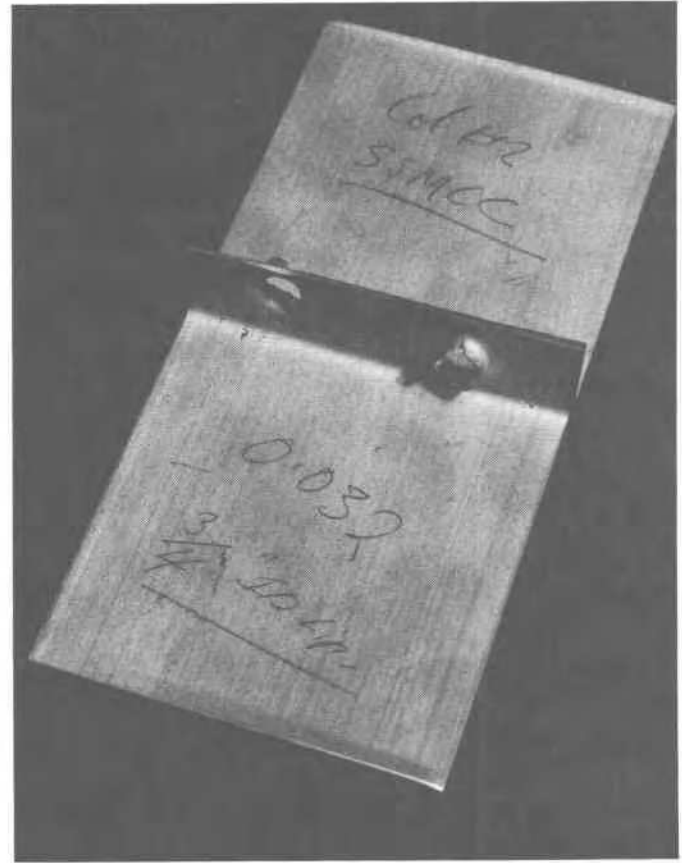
Close-Up of Crimped Seam Joint (Specimen No. 2)
